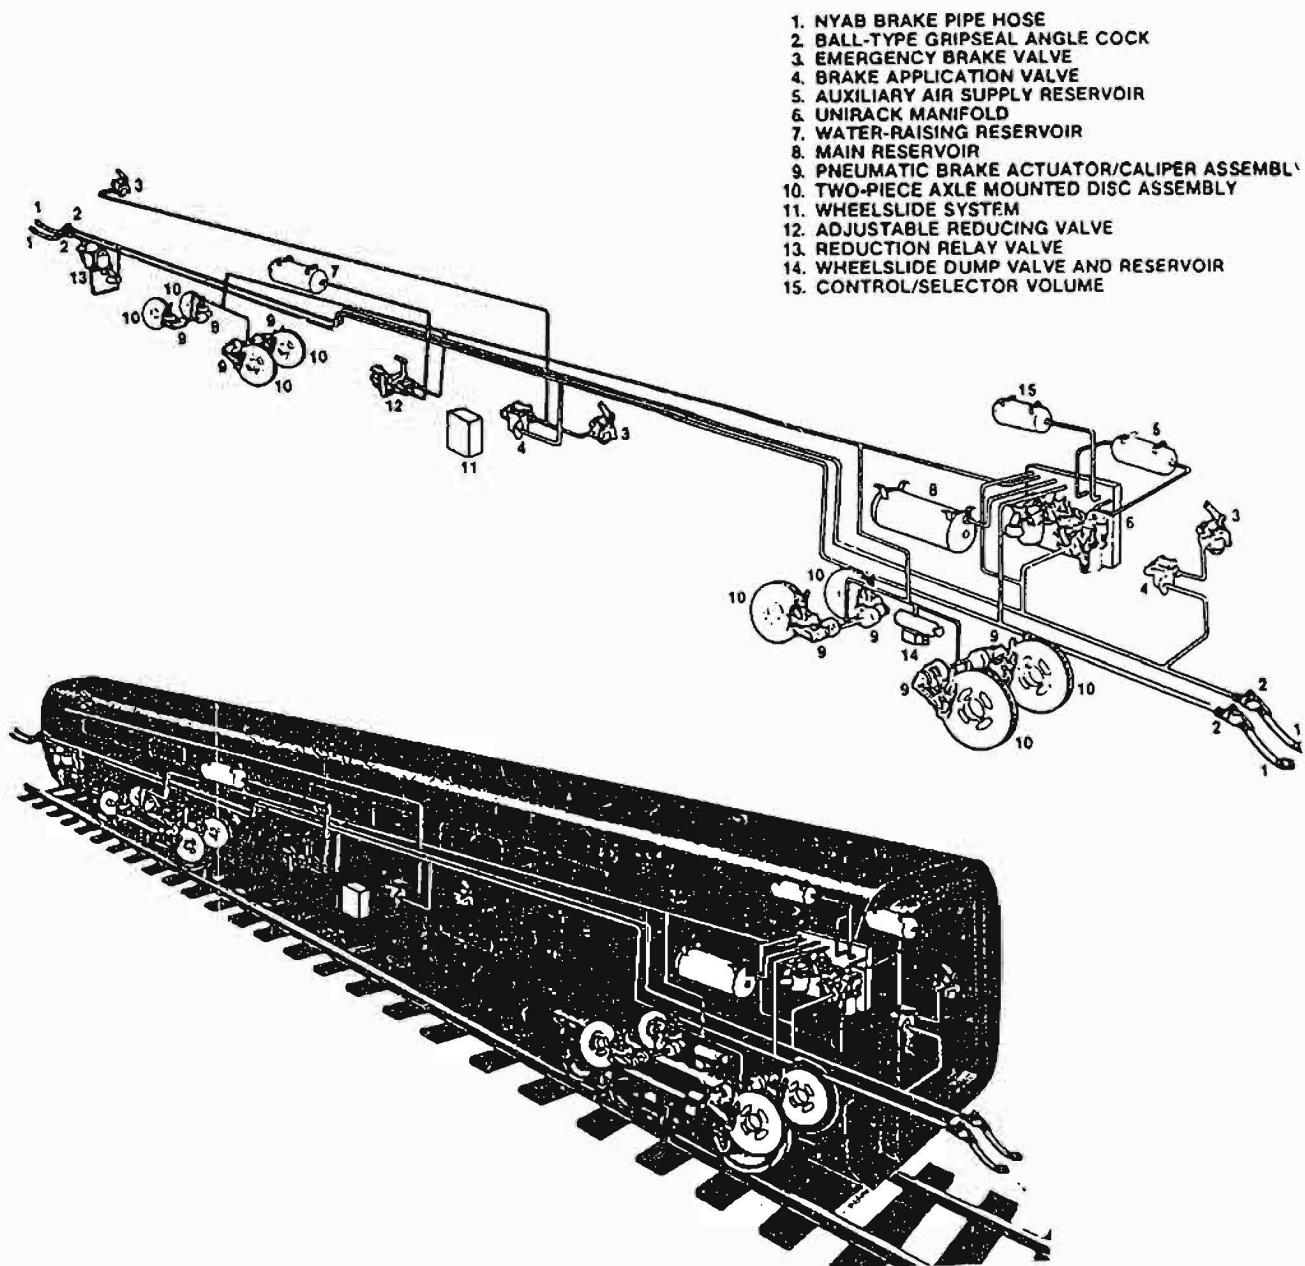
TYPICAL U.S. PASSENGER TRAIN PNEUMATIC BRAKE SYSTEM [REF. 2]
